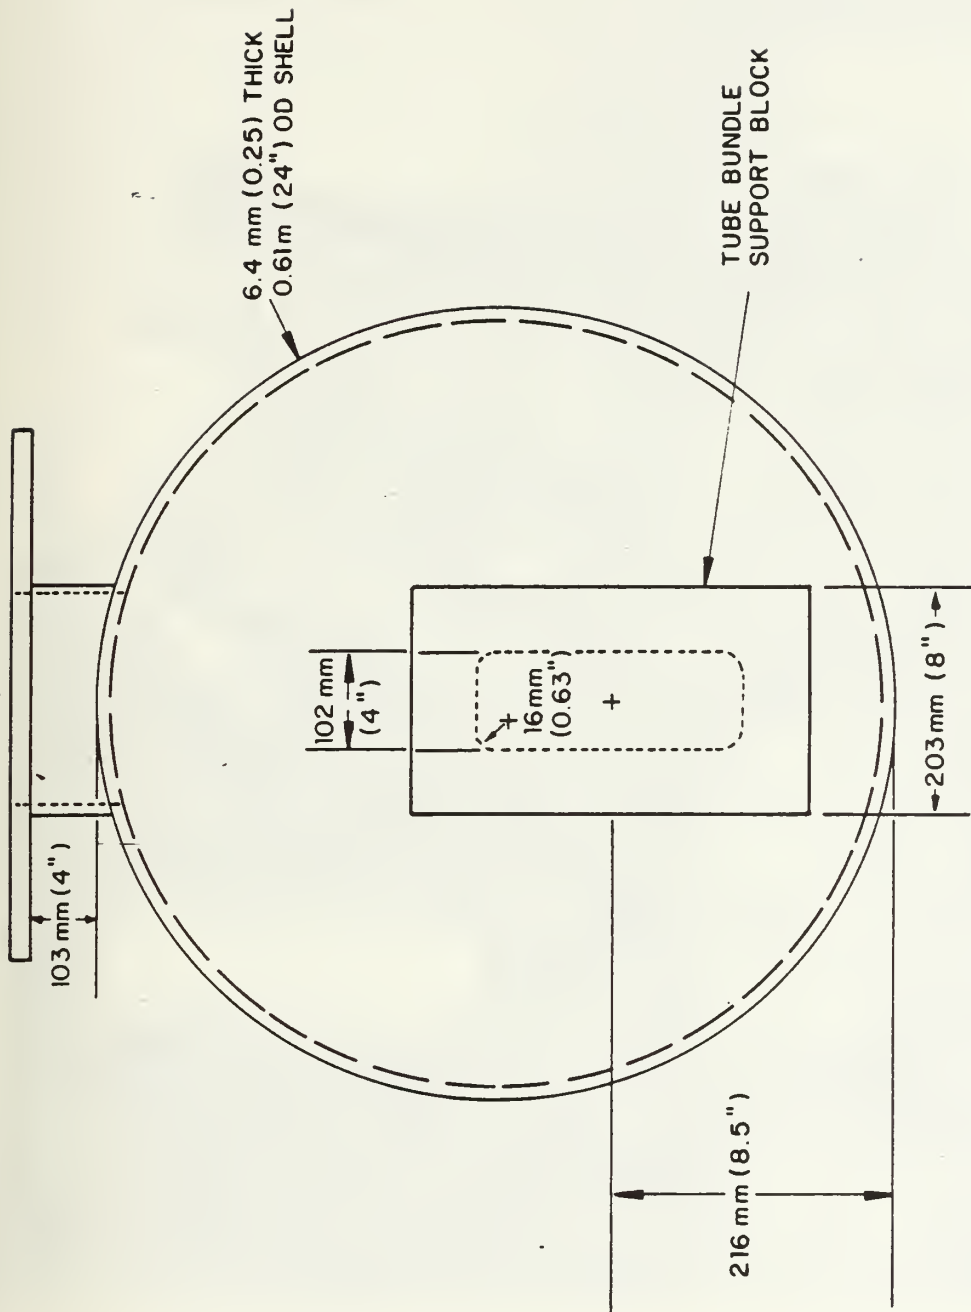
Rear View of Multi-Tube Apparatus Evaporator
